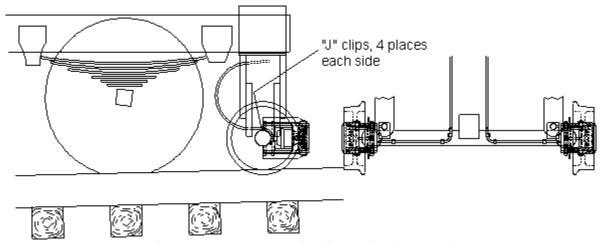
Rear Hydraulic Brake Line Routing
